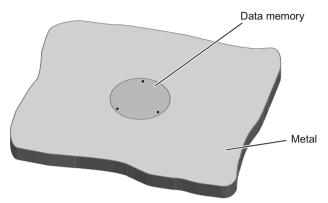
Flush-mounting of MDS D422 / D522 in metal without clearance
